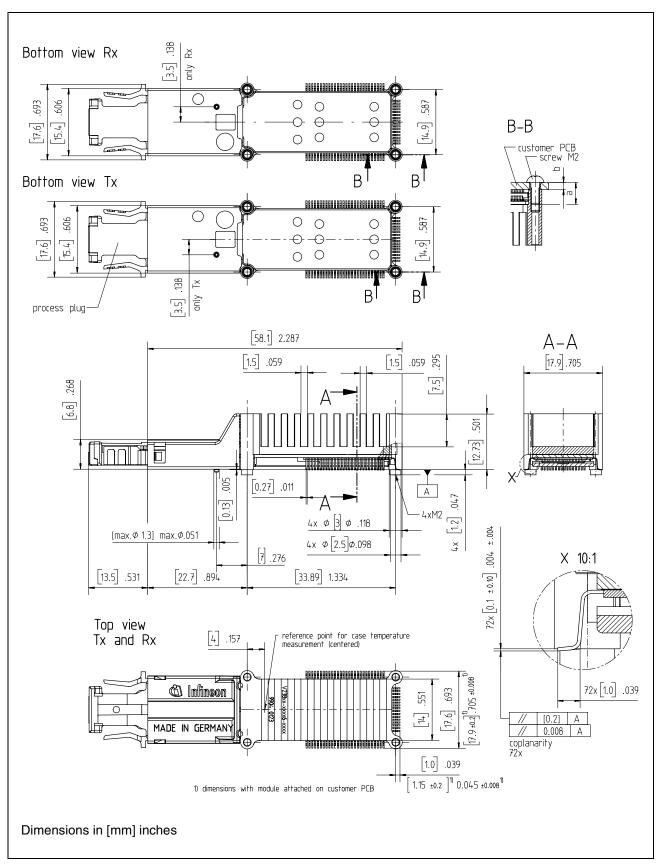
Drawing of the PAROLI Transmitter and Receiver Module
